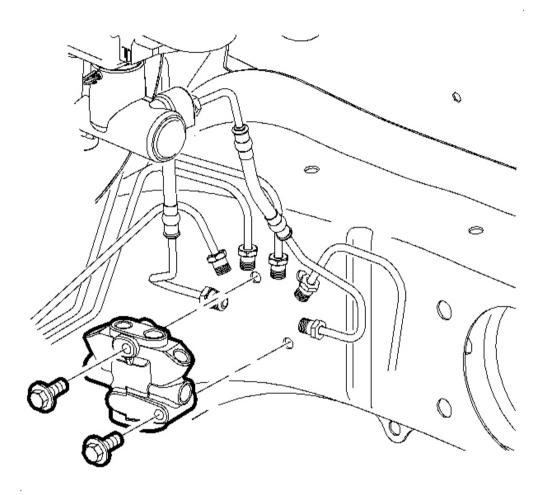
Removing/Installing Proportioning Valve Assembly Courtesy of GENERAL MOTORS CORP.
